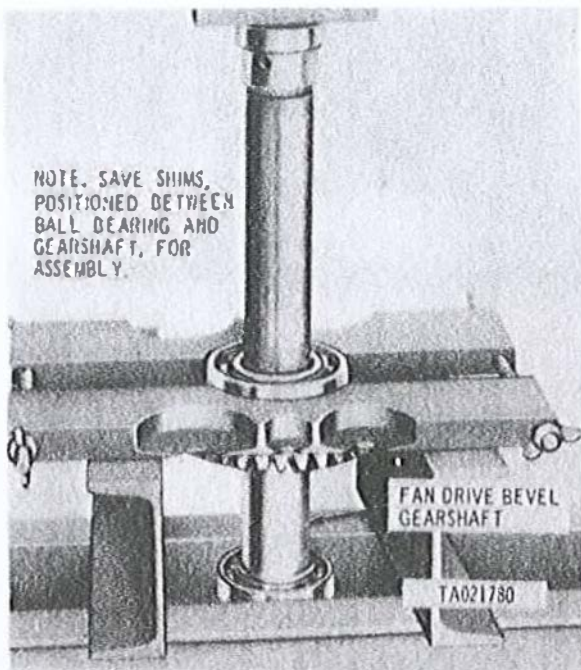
Removing fan drive bevel gearshaft ball bearings.
